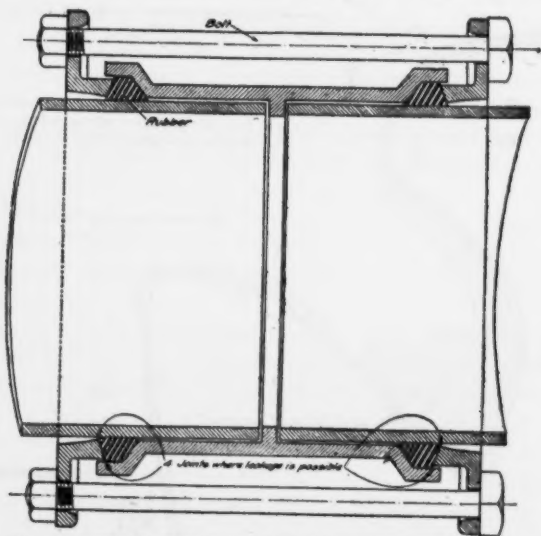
LONGITUDINAL SECTION OF GAS PIPE COUPLER SHOWING FOUR POSSIBLE LEAKAGE JOINTS.
